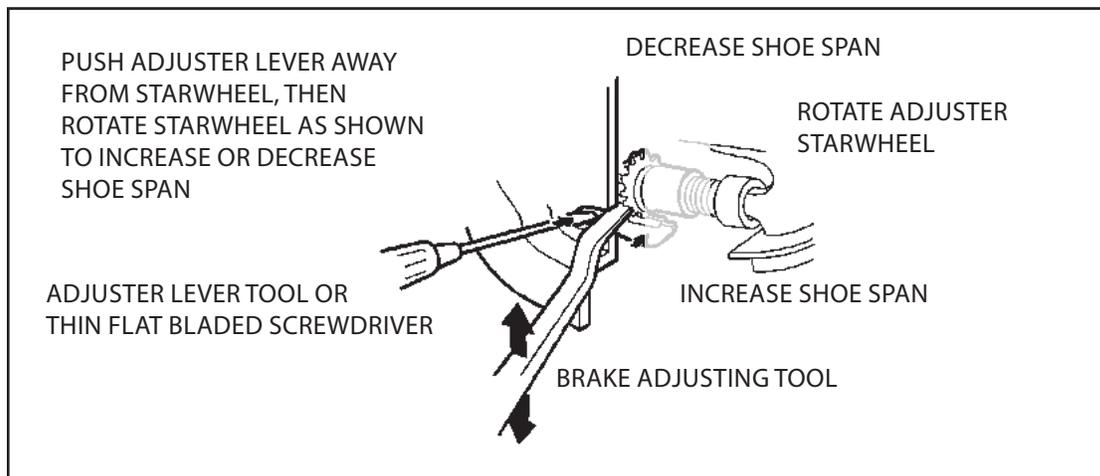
Brake Adjustment With Drum In Place (cut away view)
